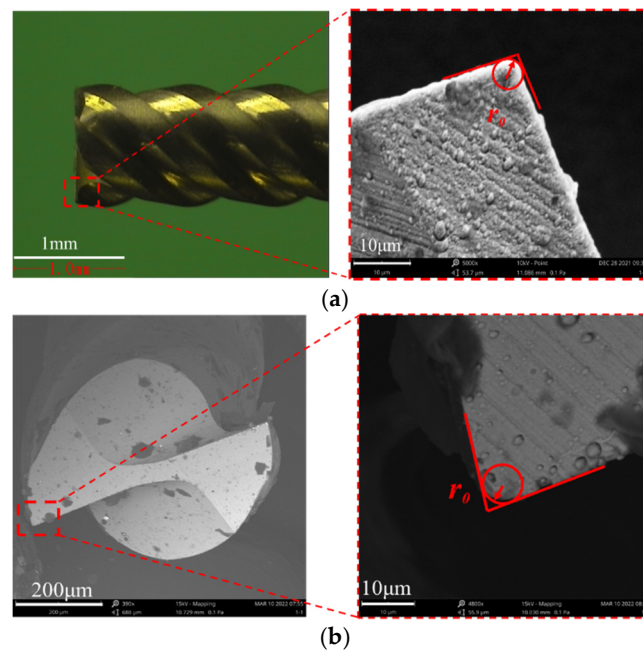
The micro-milling tool and its cutting-edge radius: (a) micro-cutter 1; (b) micro-cutter 2.
